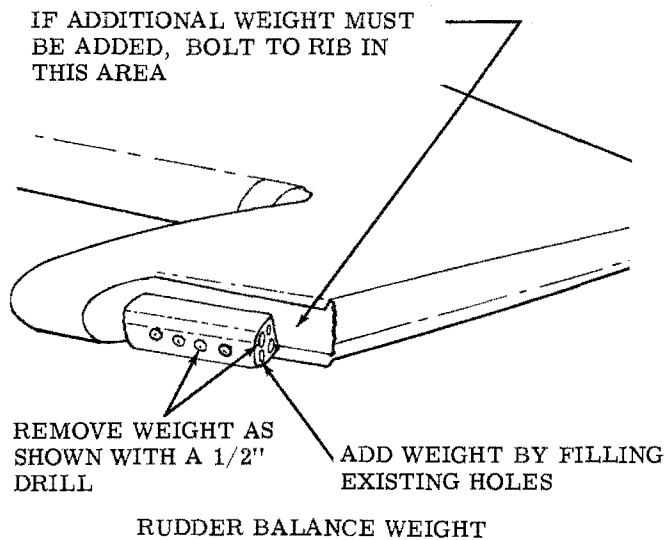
Static Balancing Aileron, Rudder and Elevator (Sheet 3 of 4)
